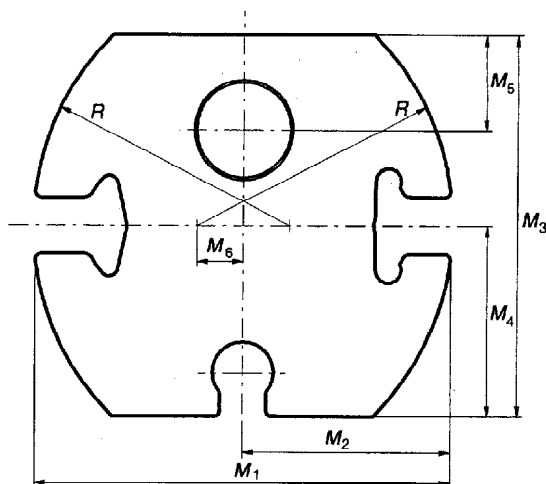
Dimensions of gauge for ball coupling size 22N
